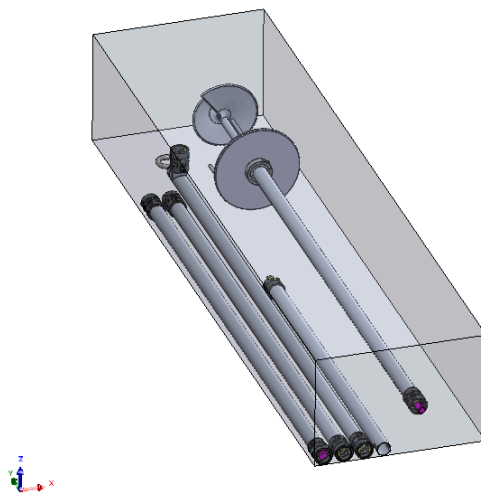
Disassembled Flagpole Device Stowed within 48 inches by 12 inches by 8 inches
